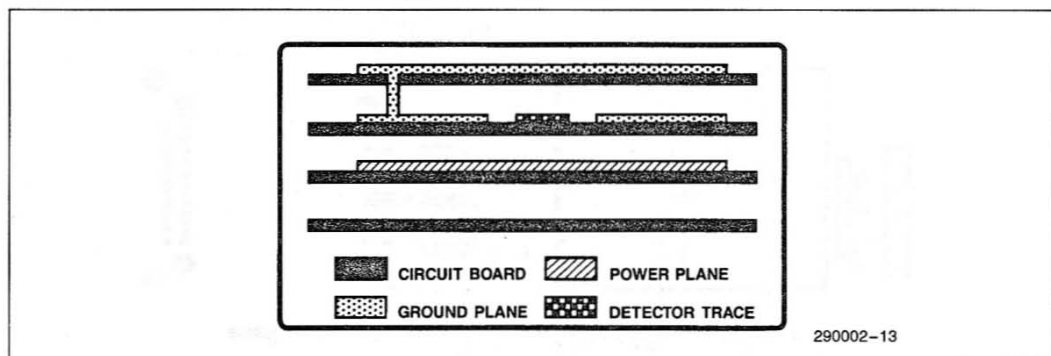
Coaxial Shielding of the Detector Traces by Using a Four-Layer Circuit Board
